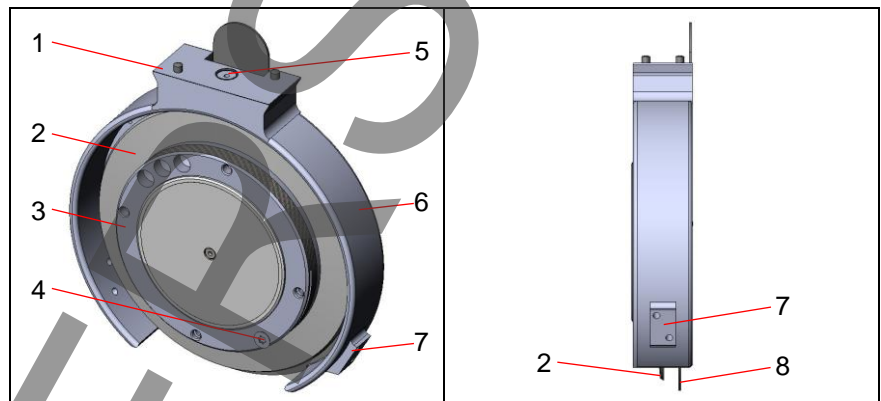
Shear cutting knife head with dished knife Ø130mm
